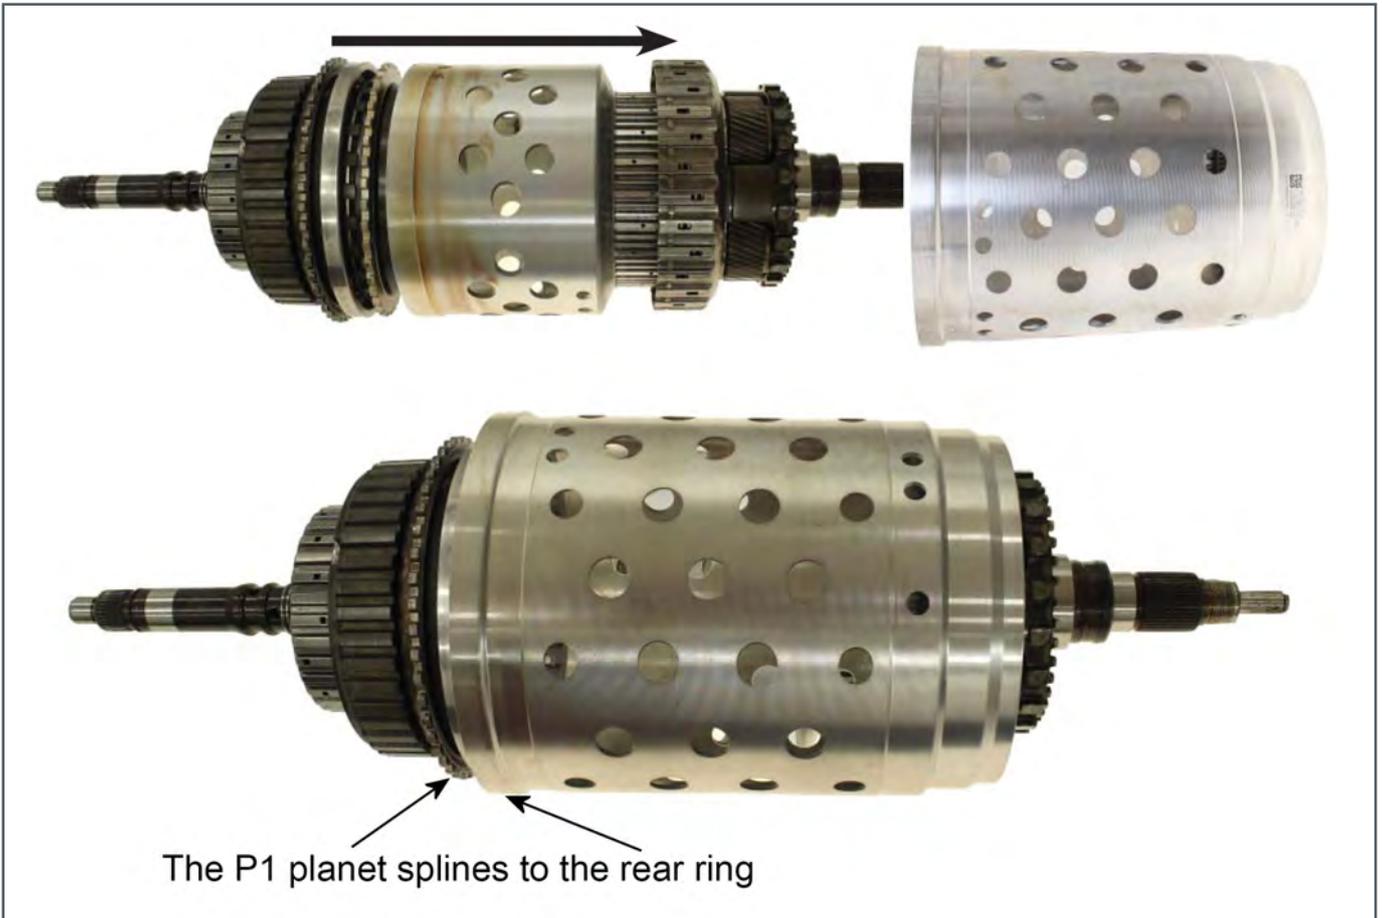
In 3rd, 4th and 5th gears the P1 planet drives the rear ring gear.
